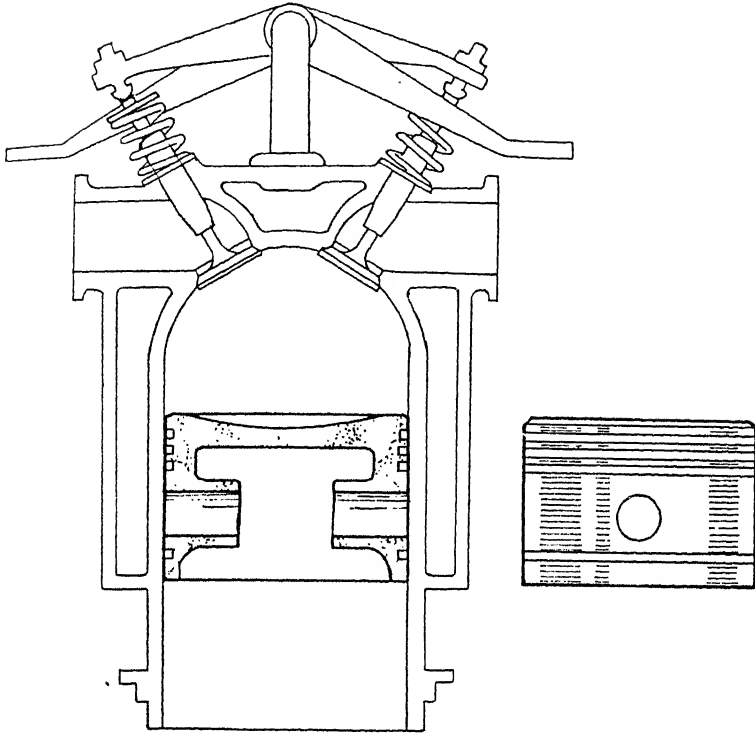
CYLINDER ASSEMBLY SHOWING PISTON.
